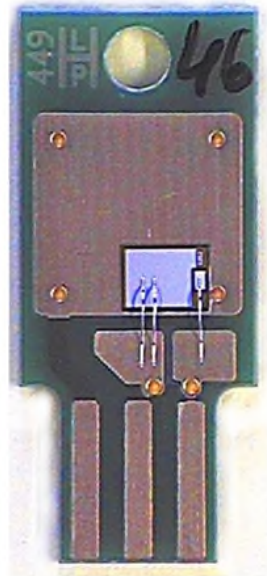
Die mounted on PCB for TID testing – soldered and wire-bonded
